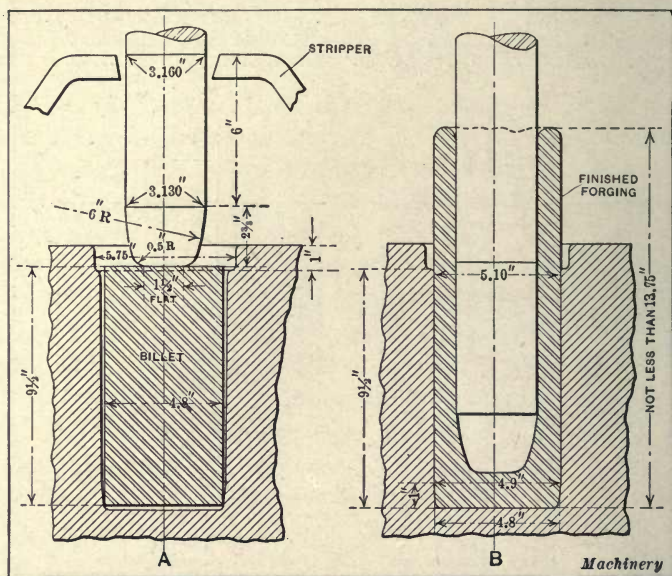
One-operation Method of making 4.5 British High-explosive Shell Forgings
